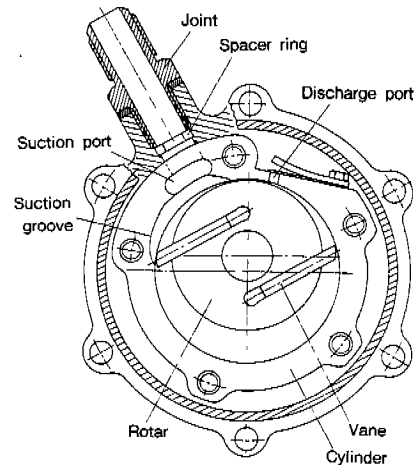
2 vane rotary type compressor (B) having spacer ring in suction passage
